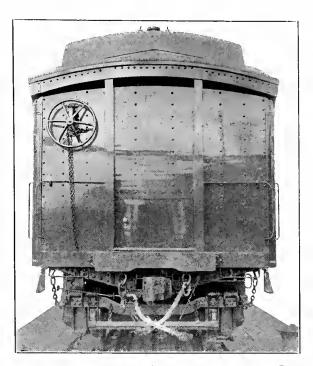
End Construction of Steel Baggage Car. Builder, The Harlan & Hollingsworth Corporation.
